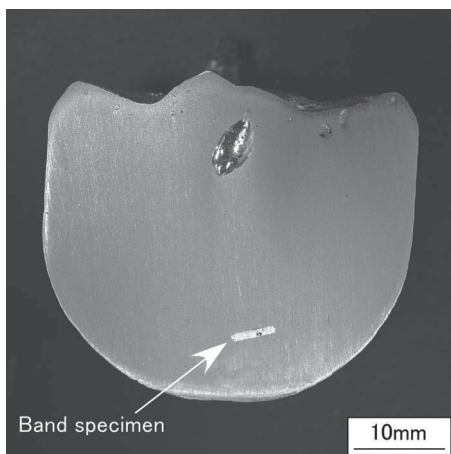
Vertical section of the aluminum casting containing the sintered Cu-Sn band specimen
